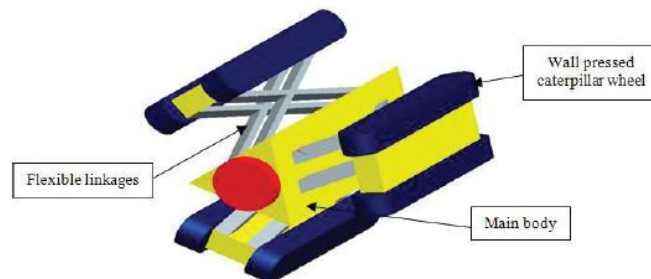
Structure of caterpillar wall pressed type robot [17]
